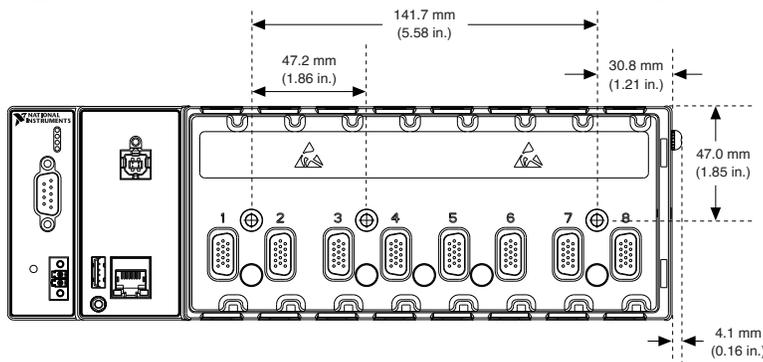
cRIO-9066/9067/9068 Surface Mounting Dimensions, Typical
